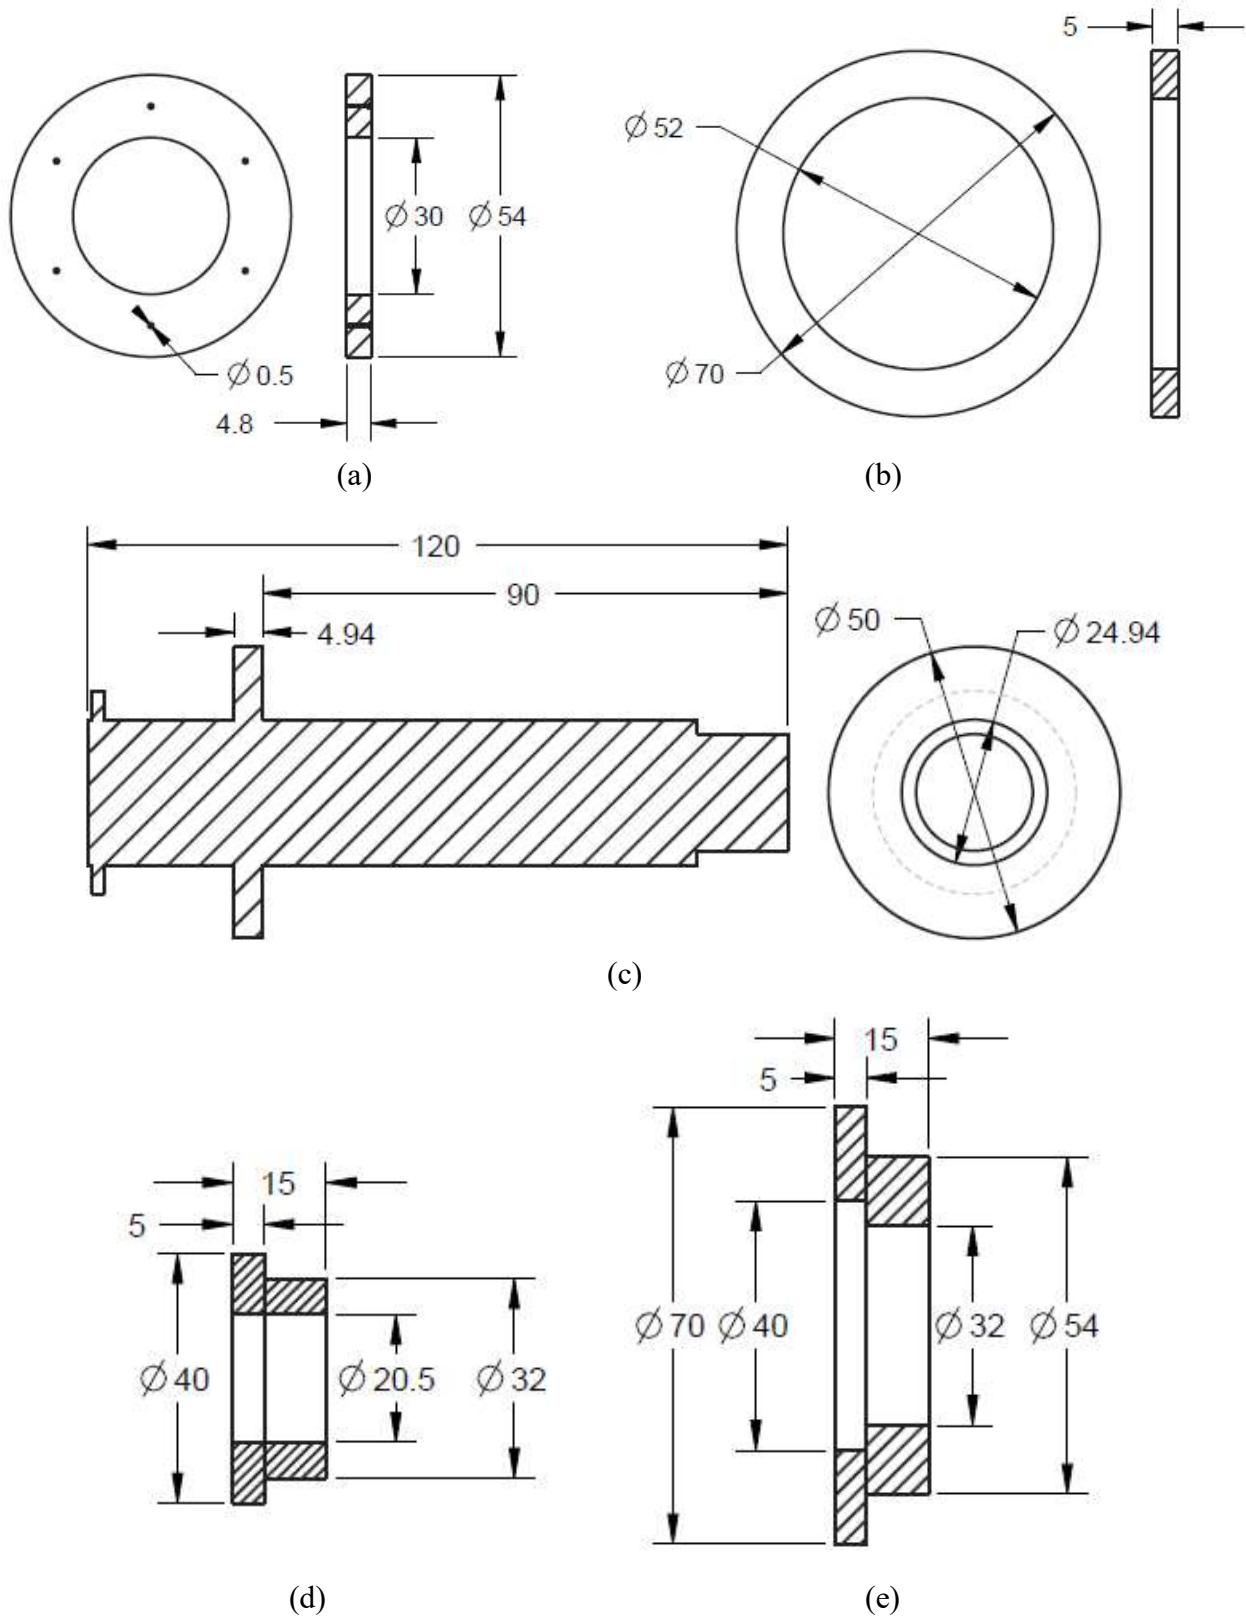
Components of bearing assembly (a) thrust plate, (b) bearing separator, (c) spindle, (d) bearing bush, and (e) bush cover
